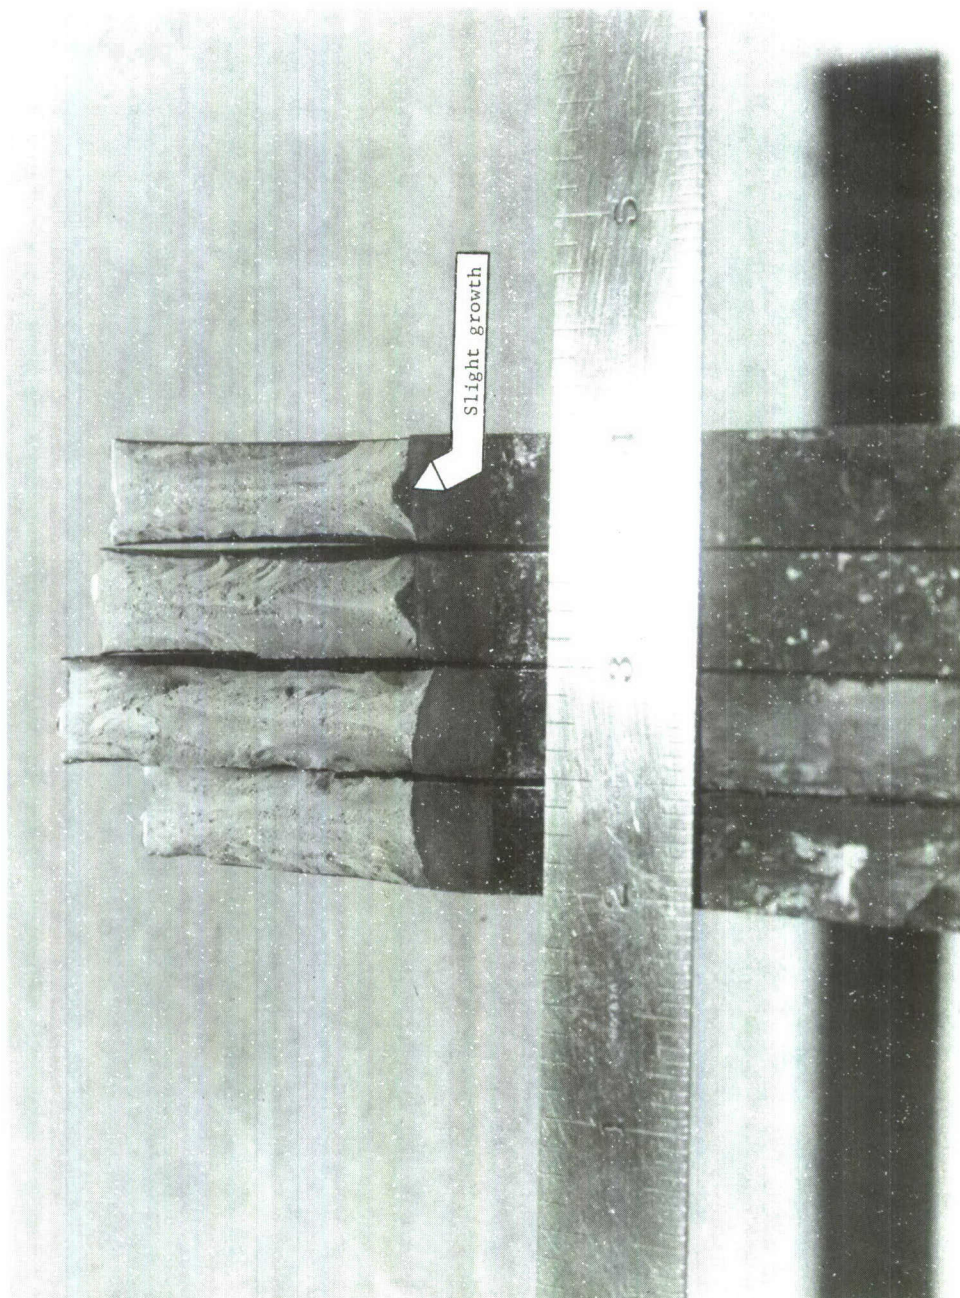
Stress Corrosion Fracture Surfaces T-1 Steel
